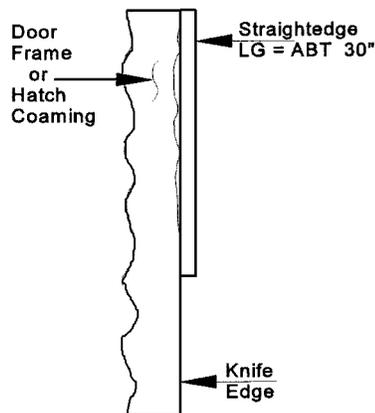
Knife-Edge Inspection Using Straightedge Method
